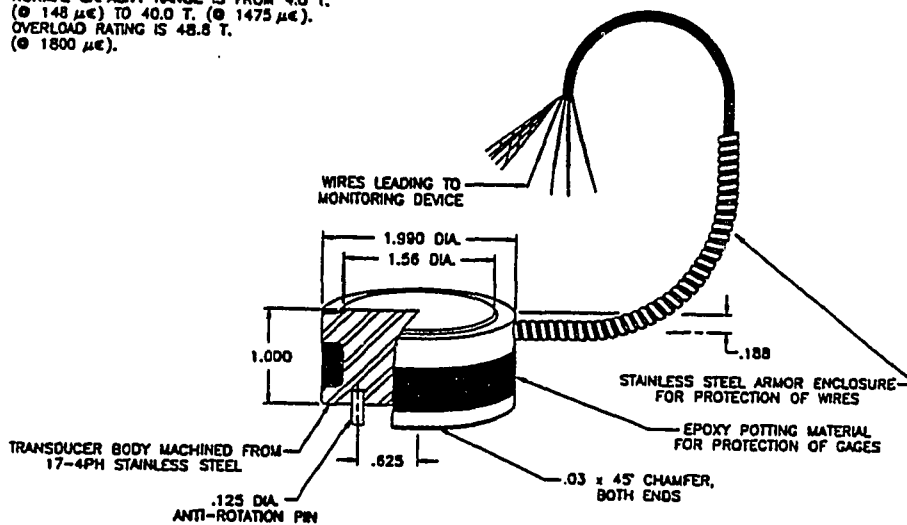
40 ton loadcell for measuring blankholder force in deep drawing tooling on Minster press.
